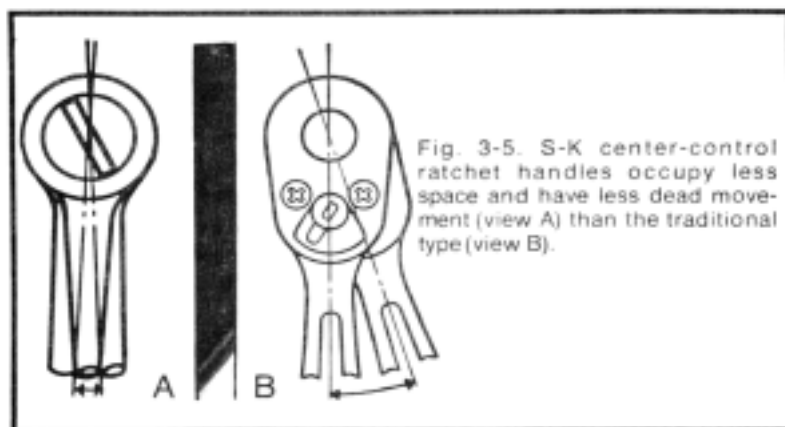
S-K center-control ratchet handles occupy less space and have less dead movement (view A) than the traditional type (view B).
